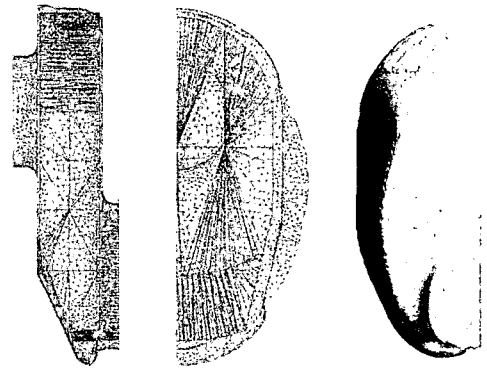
(b) Analysis result of crank throw "C" forged by the proposed closed-die forging equipment
